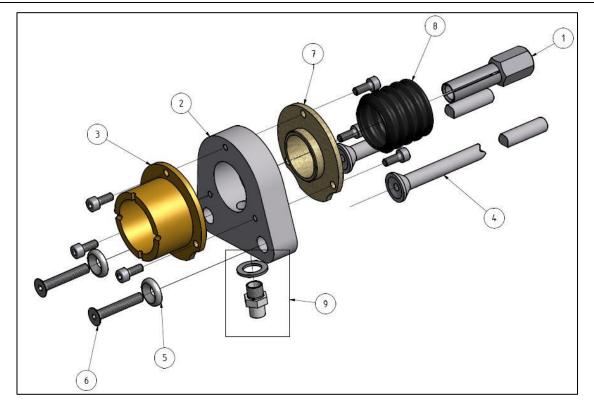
Gun accessories for Stud welding with shielding gas (Gun K 22)
